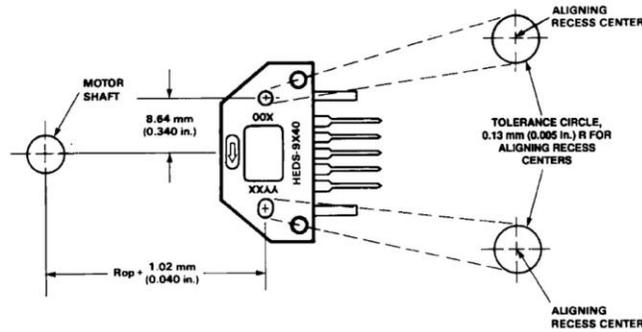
HEDS-9X40 Mounting Tolerance.
